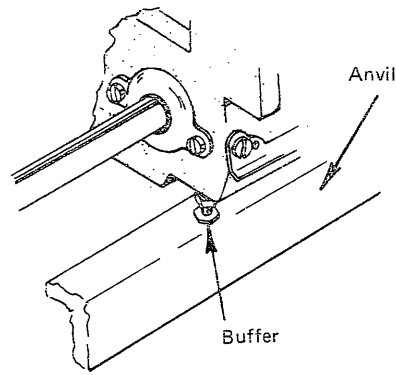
Carrier Buffers (Level 1, 15-Inch Machines)
